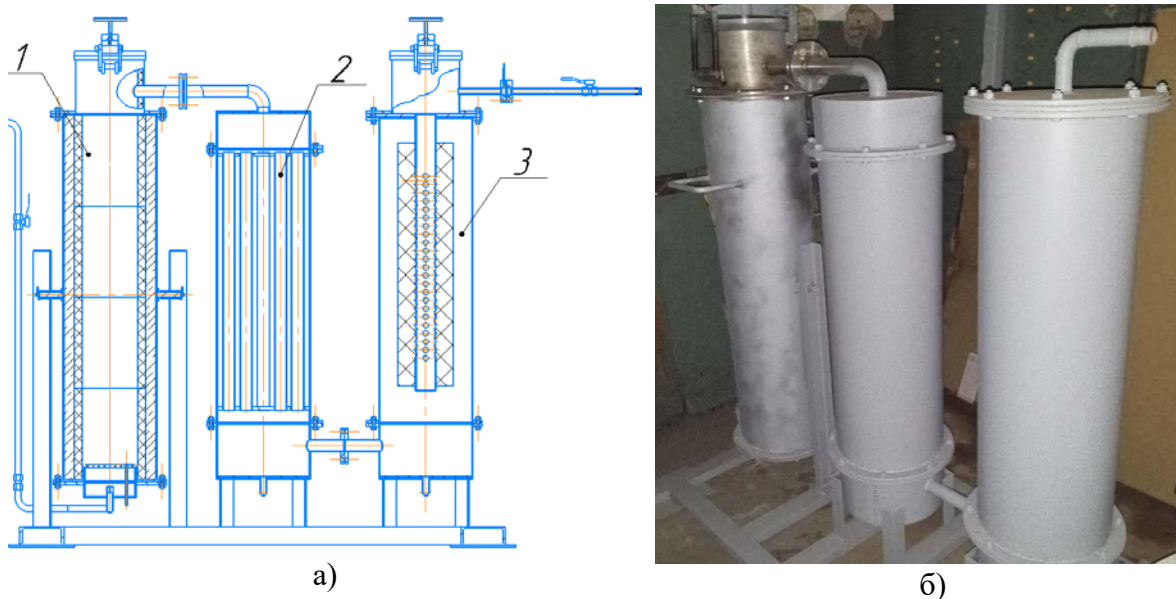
Assembly drawing (a) and working section (b) of gasification
